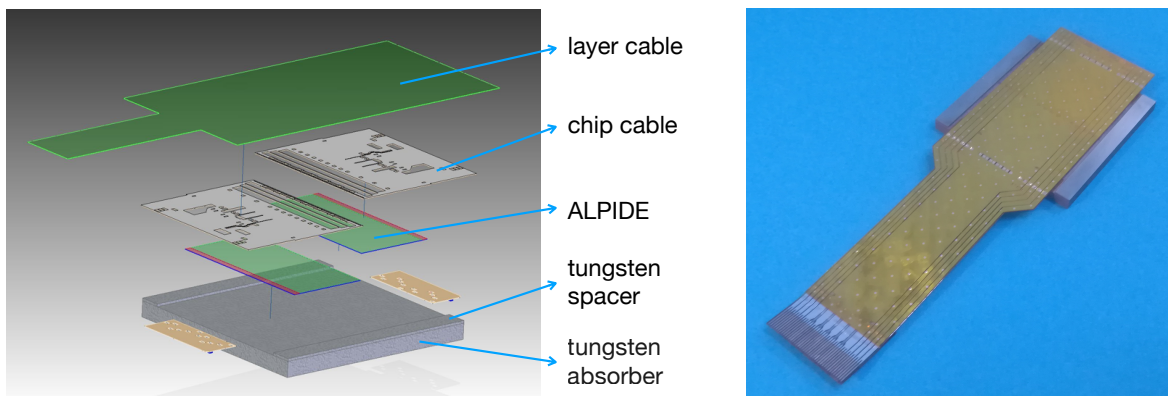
Left:* Explosion view of a single instrumented EPICAL-2 layer visualising the main components. *Right:* Photo of a single assembled layer of EPICAL-2.
